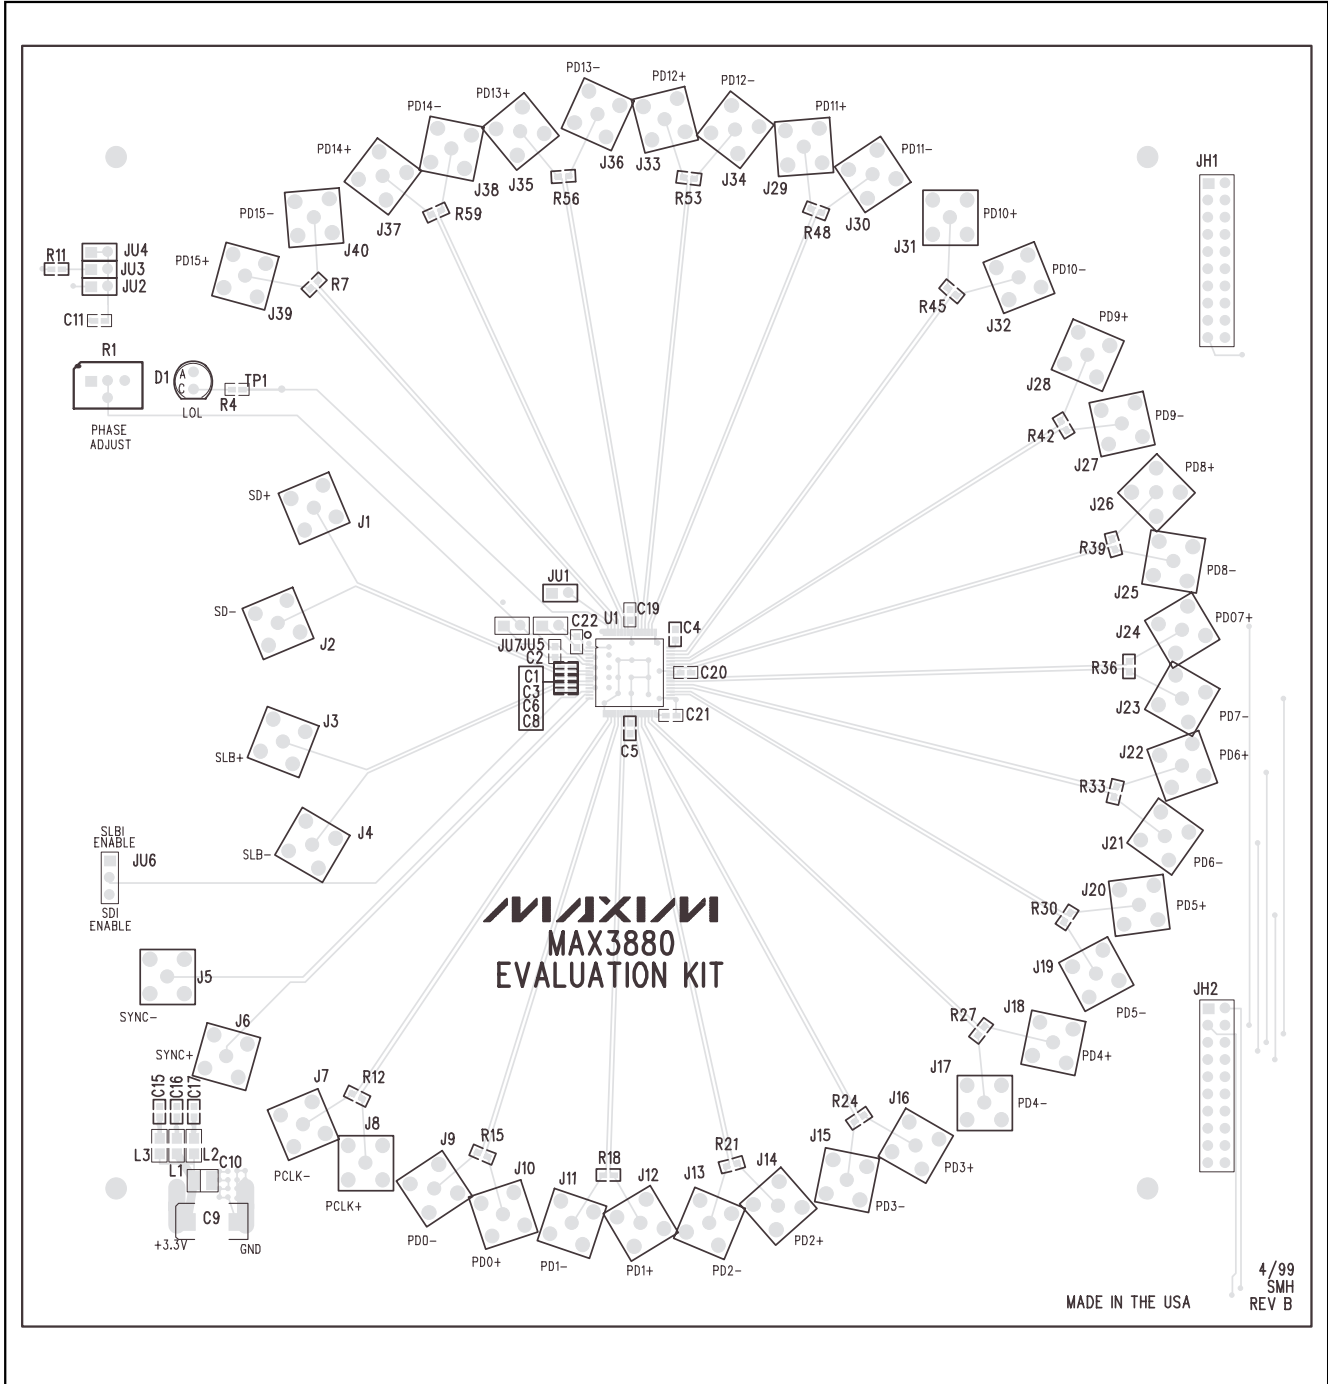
MAX3880 EV Kit Component Placement Guide—Component Side
